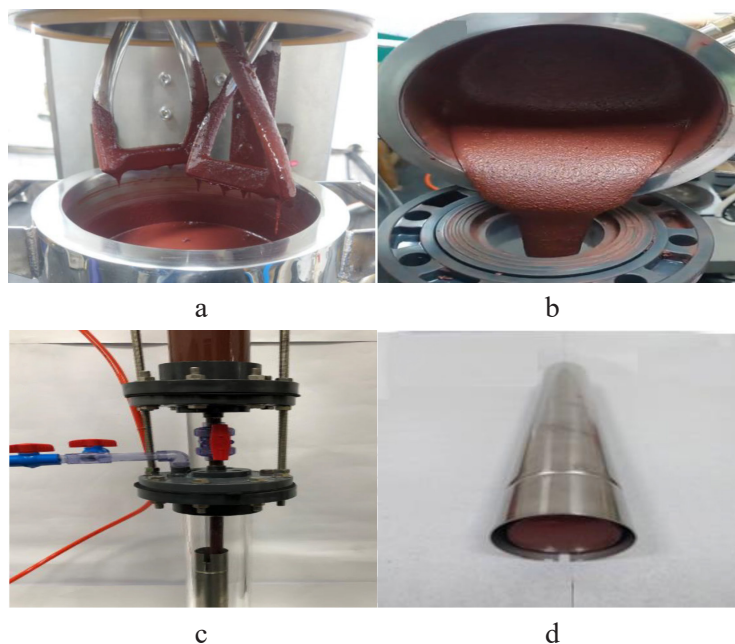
Preparation process of the smoke candle: mixing ingredients by using single planetary vacuum defoaming mixer (a), pouring the prepared mixture into vacuum pour-casting tool (b), preparing smoke candle by vacuum pour-casting (c) and curing in vacuum oven (d)
